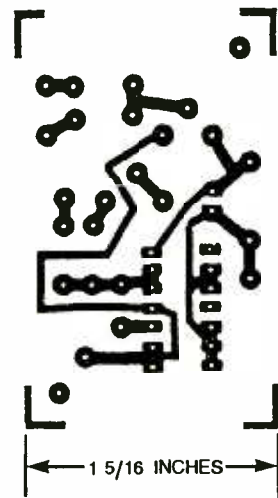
The IR-illuminator circuit was assembled on a printed-circuit board. A template for that printed-circuit layout is shown here full size.
